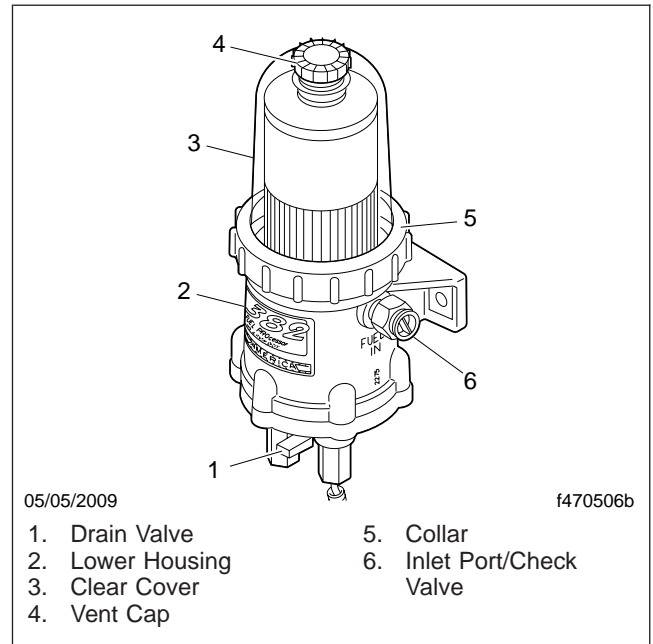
, DAVCO Fuel/Water Separator (Fuel Pro 382 Shown)
